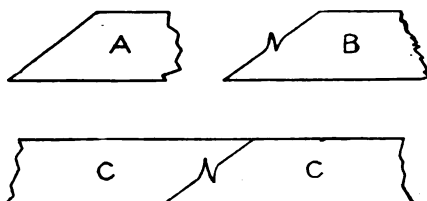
A.—READY FOR AN ORDINARY SCARF WELD. B.—PIECE WITH NOTCH. C, C.—NOTCHED PIECES PLACED FOR WELDING.
